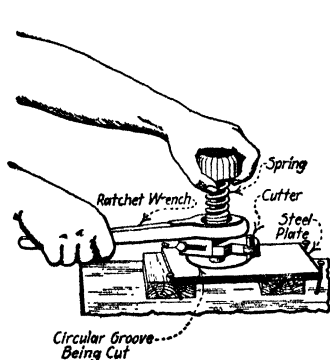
Close up view of Jiffy Cutter showing method of tightening knives.
